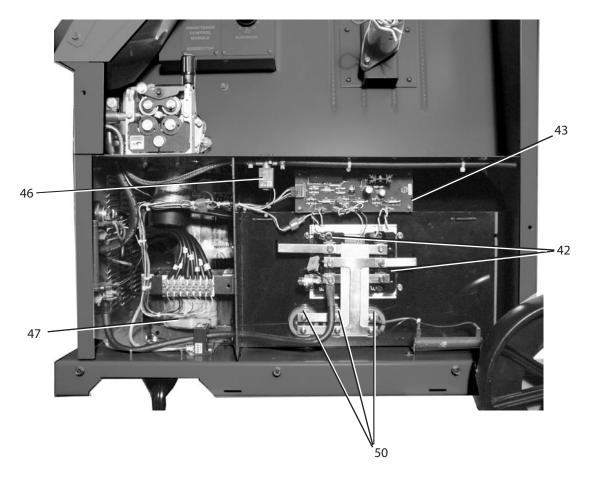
Inside Right & Rear View of Multimaster 260 (cont.)
